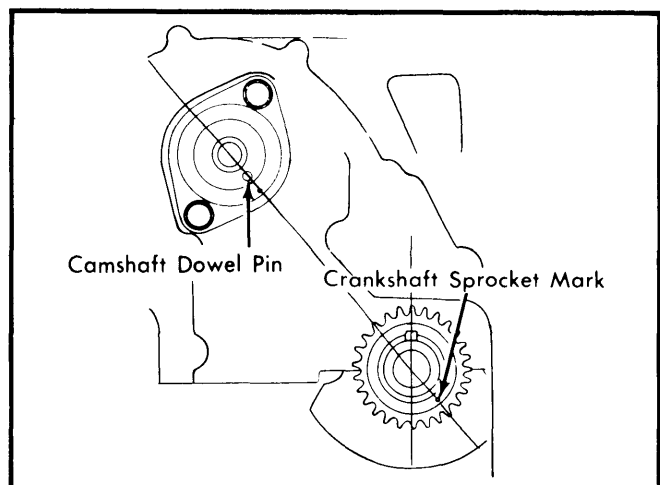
Aligning Marks for Timing Chain & Sprocket Installation
